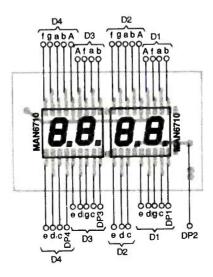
DISPLAY BOARD PARTS PLACEMENT. Connect the display board to the main circuit board with a 24-conductor flat cable.
